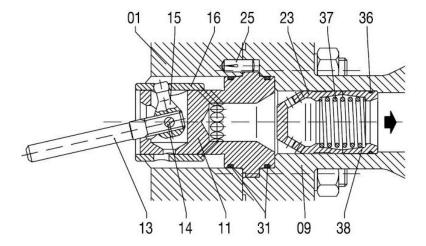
Sectional drawing and parts list of the bypass type TDL (example)
